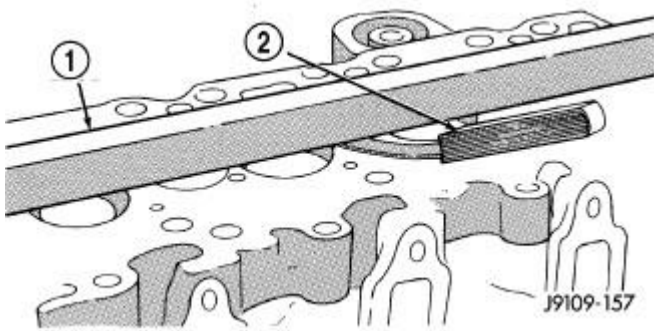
Inspecting Cylinder Head Combustion Deck Face For Warpage
